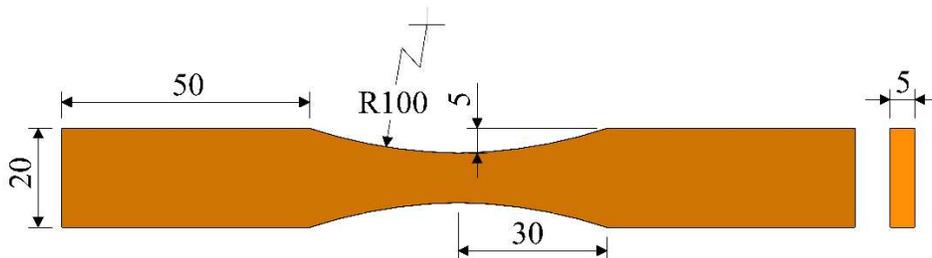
Dimension of tensile and fatigue test specimen as per ISO 11782-1
